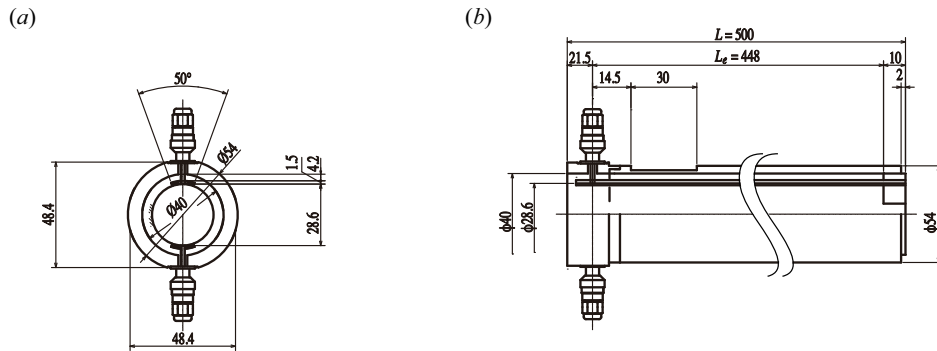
Mechanical drawings of the beam-timing monitor, (a) front view, and (b) side view. The length is indicated in millimeters.
